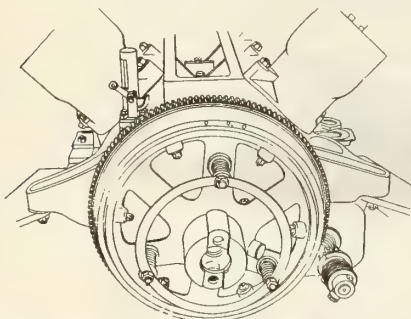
Full view of clutch showing three main springs and six plungers and nuts.
